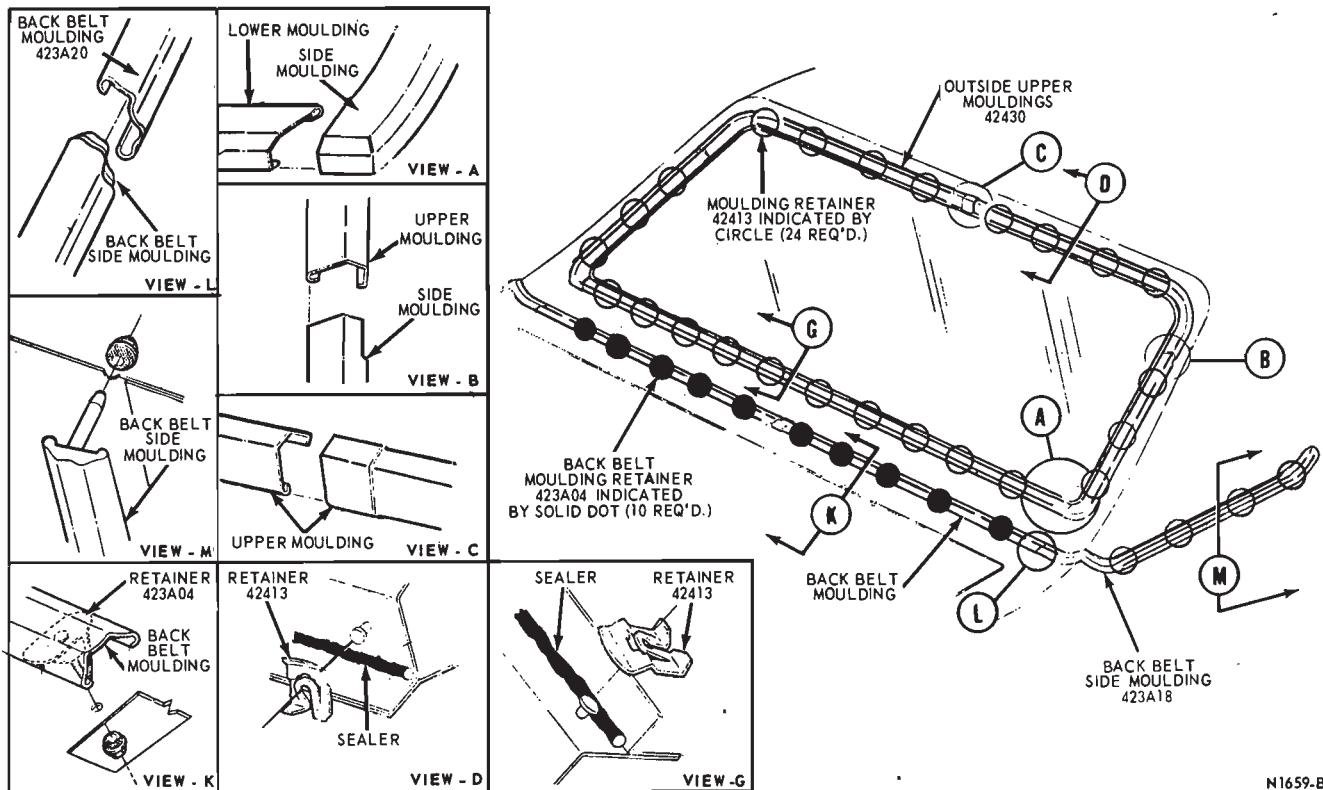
Back Window and Exterior Moulding Installation—Falcon, Fairlane and Montego Model 63
